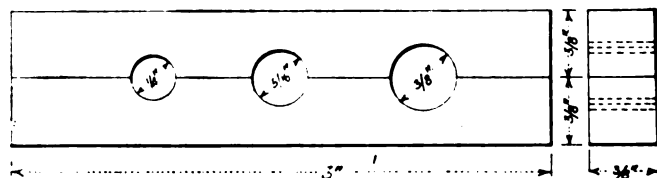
TOOL FOR FLANGING COPPER TUBING
